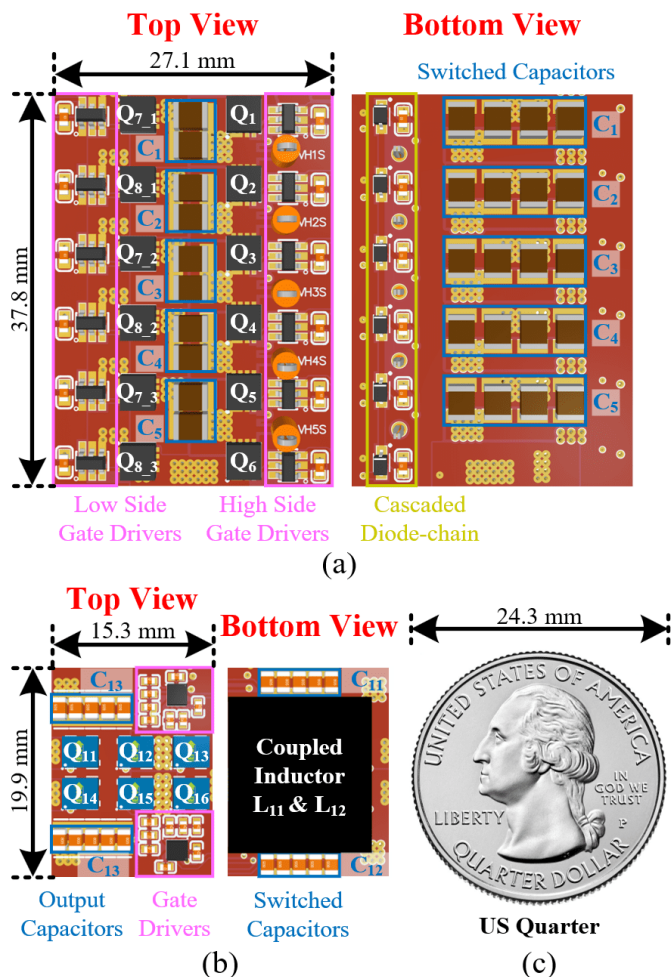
Top and bottom views of the PCB layout of (a) the front-end of the prototype converter and (b) one back-end module of the prototype converter. (c) The size of a US Quarter. Each back-end regulator is smaller than a US quarter, having the potential to be integrated and stacked with each individual chip in the chiplet applications.
